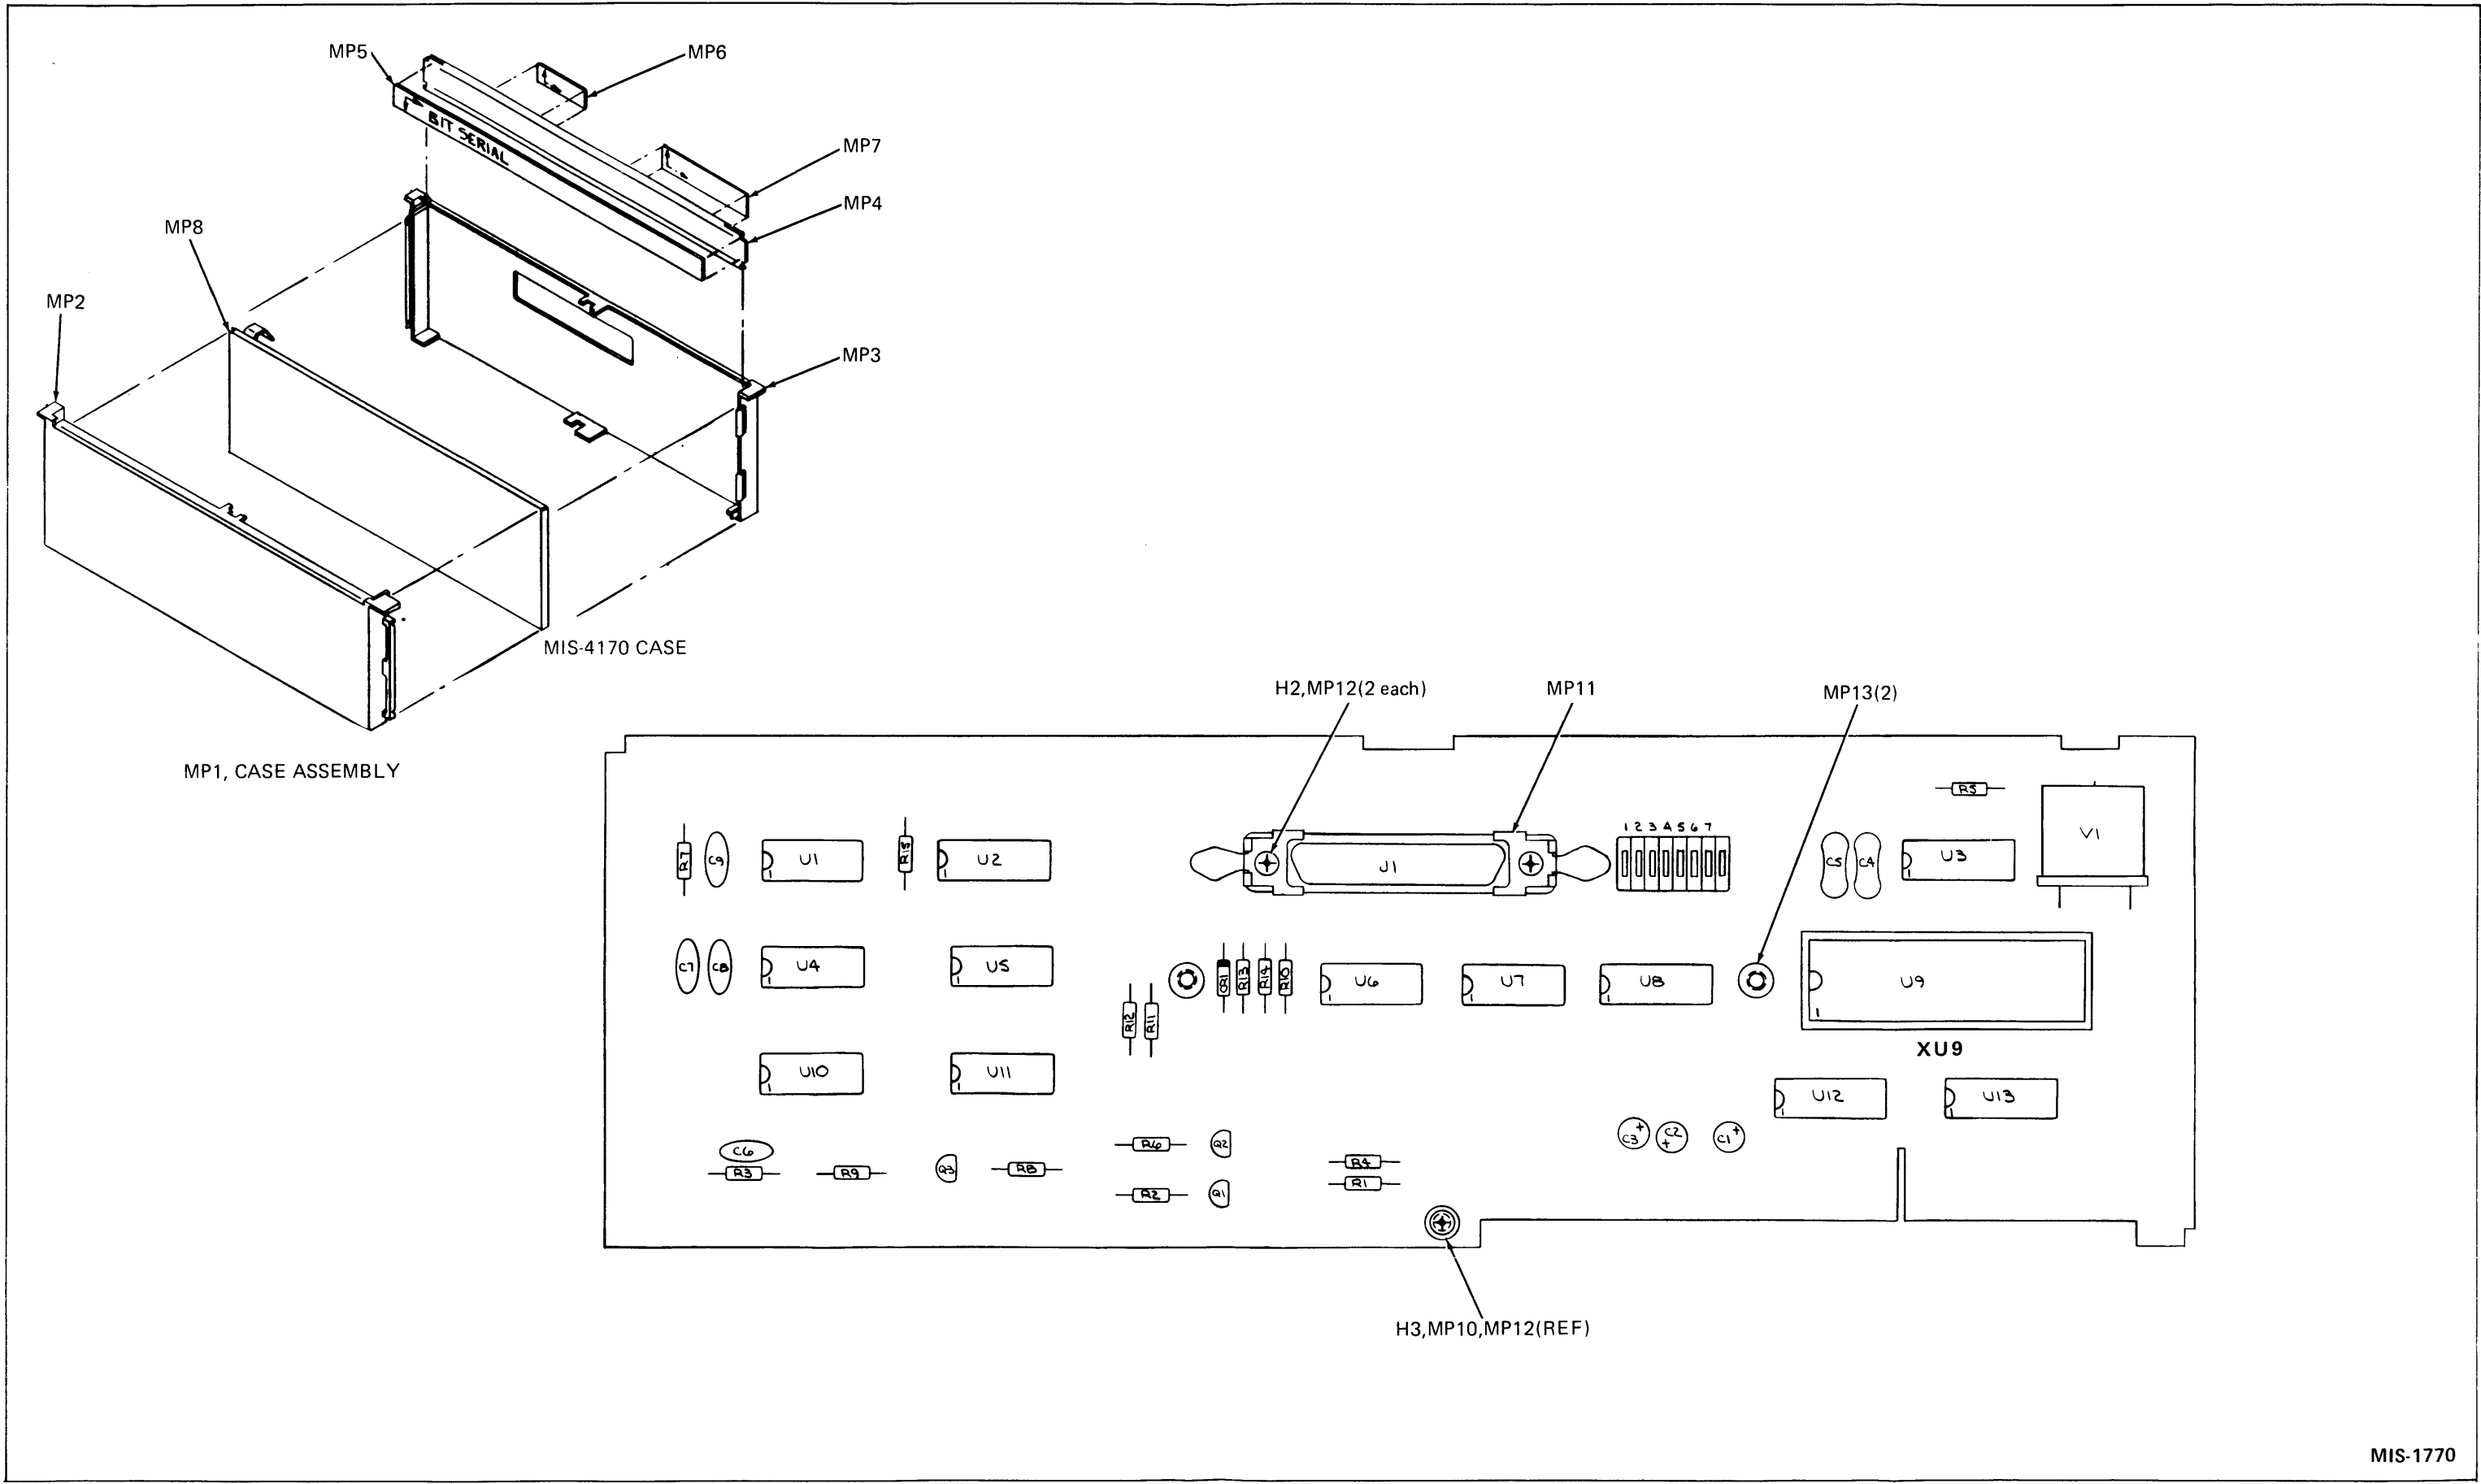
Bit Serial Asynchronous Interface PCB Assembly
